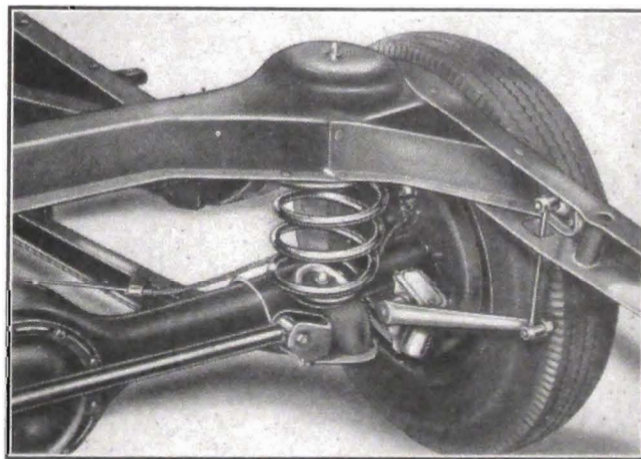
Rear Shock Absorber Mounting—Series 40-60
